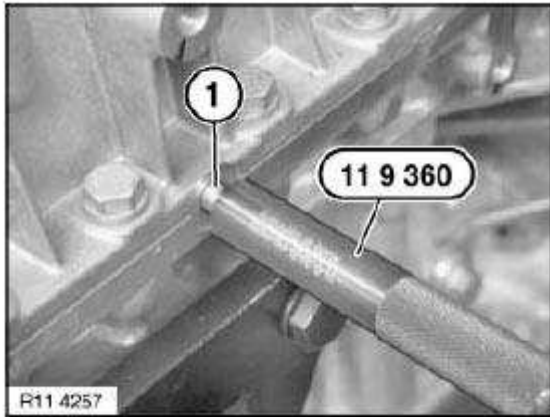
Inserting Nozzles Using Special Tool 11 9 360
